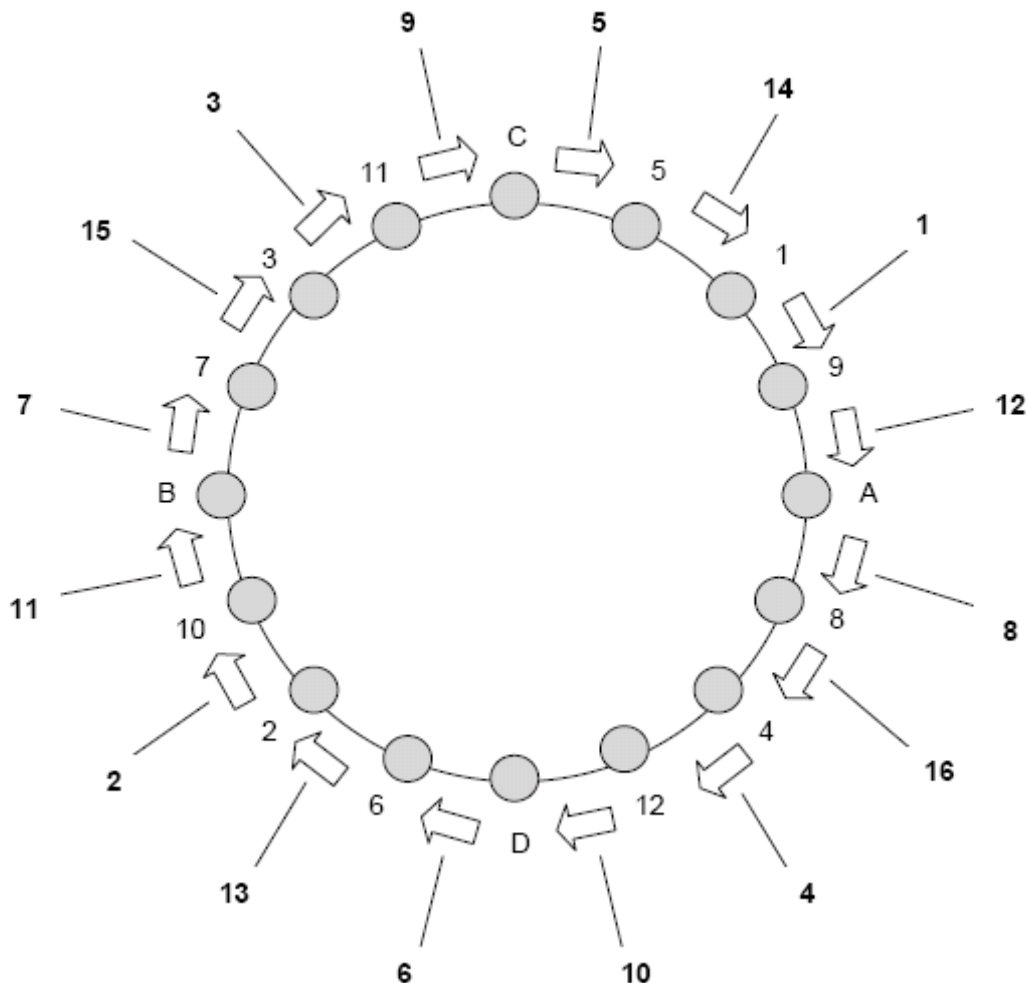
, Tack to Tack EXTERNAL welding
